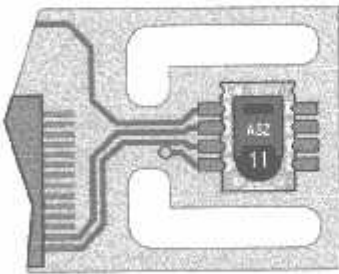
Top view of example of mounted SHT1x with slits milled into PCB to minimize heat transfer.
